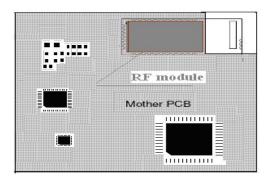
A recommended placement of the module on a mother PCB (Shaded area is ground-plane on mother PCB)
